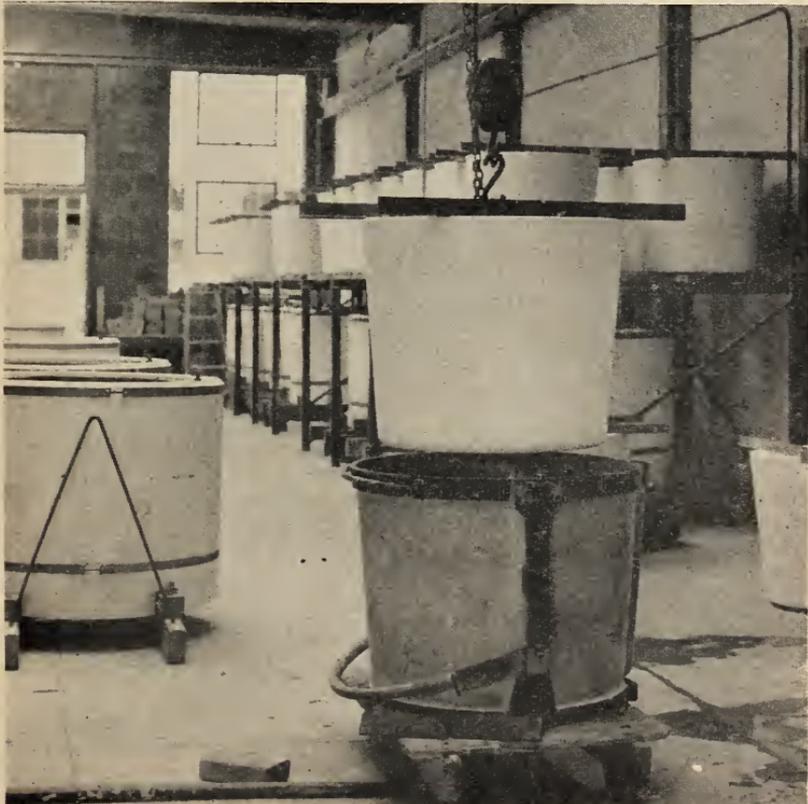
Core of pot mold ready to be lowered into empty clay-slip receiver.
